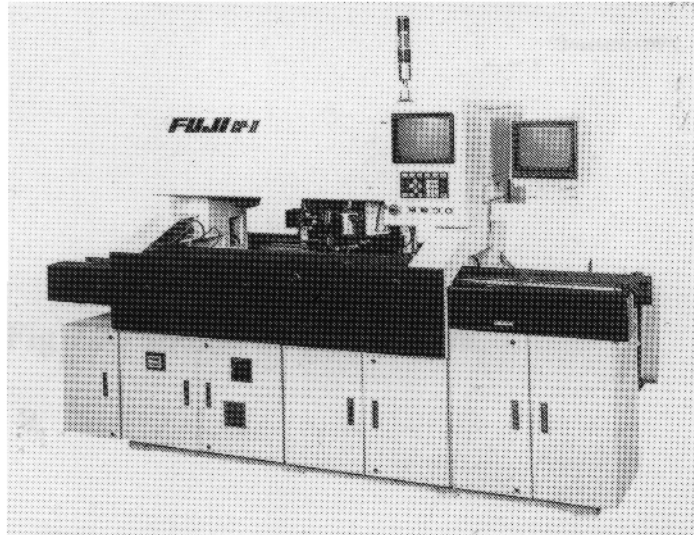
Fuji CP-II pick-and-place machine. The machine has magazine for over 100 types of small components, nominal speed up to 15 000 components per hour, placement accuracy 0.10 mm. It has a rotating head with 12 positions, bottom figure, and two alternative tools at each position. There are components at all 12 positions at any time, with a separate operation being performed. A CCD camera shows the accurate position and orientation on a CRT screen (Fuji).
